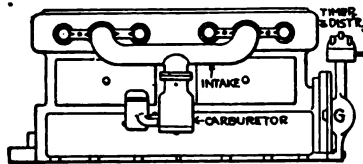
Ford block showing installation of built-up manifold, carburetor and ignition apparatus
